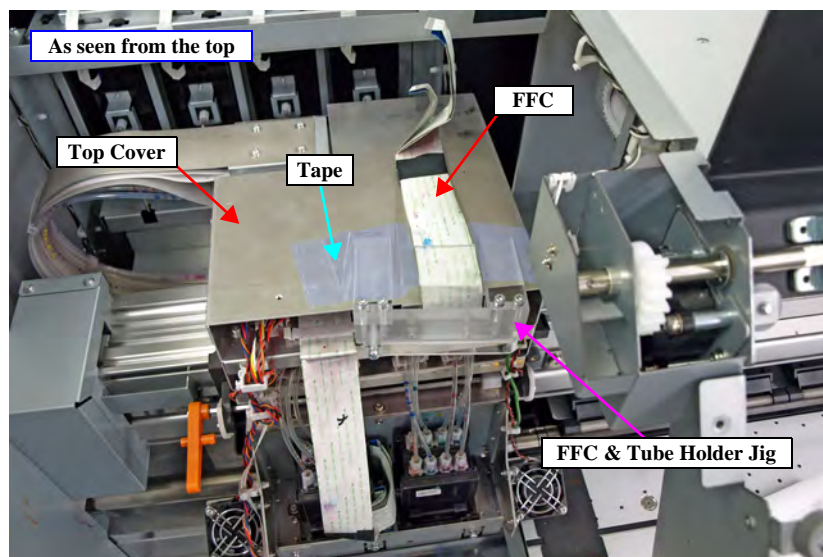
Removing the FFC and attaching the FFC & Tube Holder Jig
